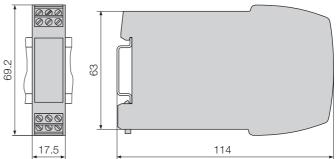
SINEAX V 624 in housing P12/17 clipped onto a top-hat rail (35 x 15 mm or 35 x 7.5 mm, acc. to EN 50 022), connecting screw terminals not pluggable.
